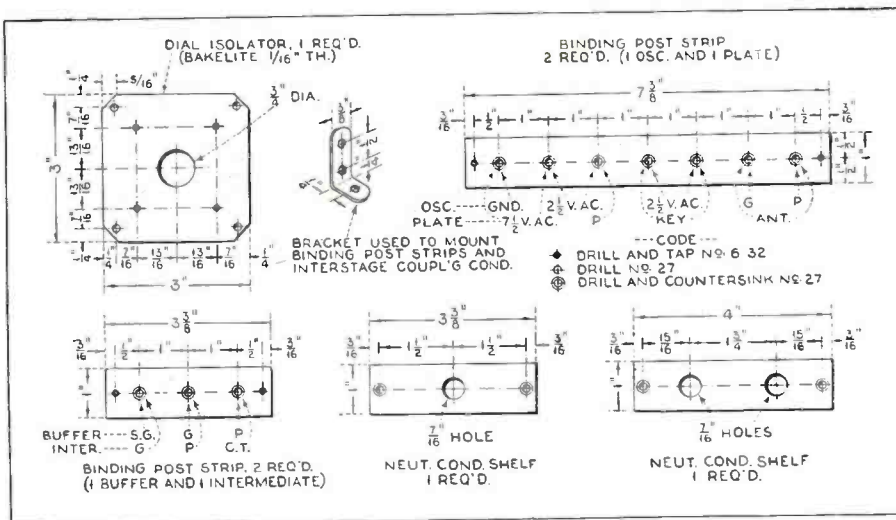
A (left); Figure 5-B (below). The details of binding post strip assemblies, coil mountings and other miscellaneous fabricated parts
